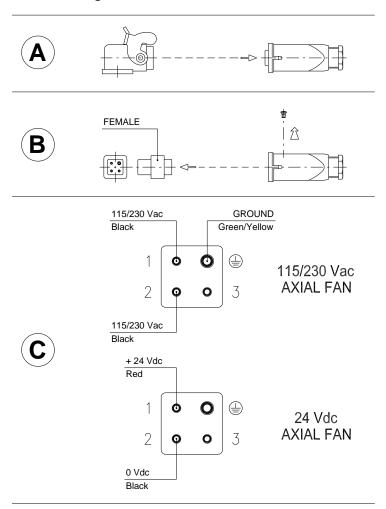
Removal of connector (A-B) and electrical cable connection (C)
